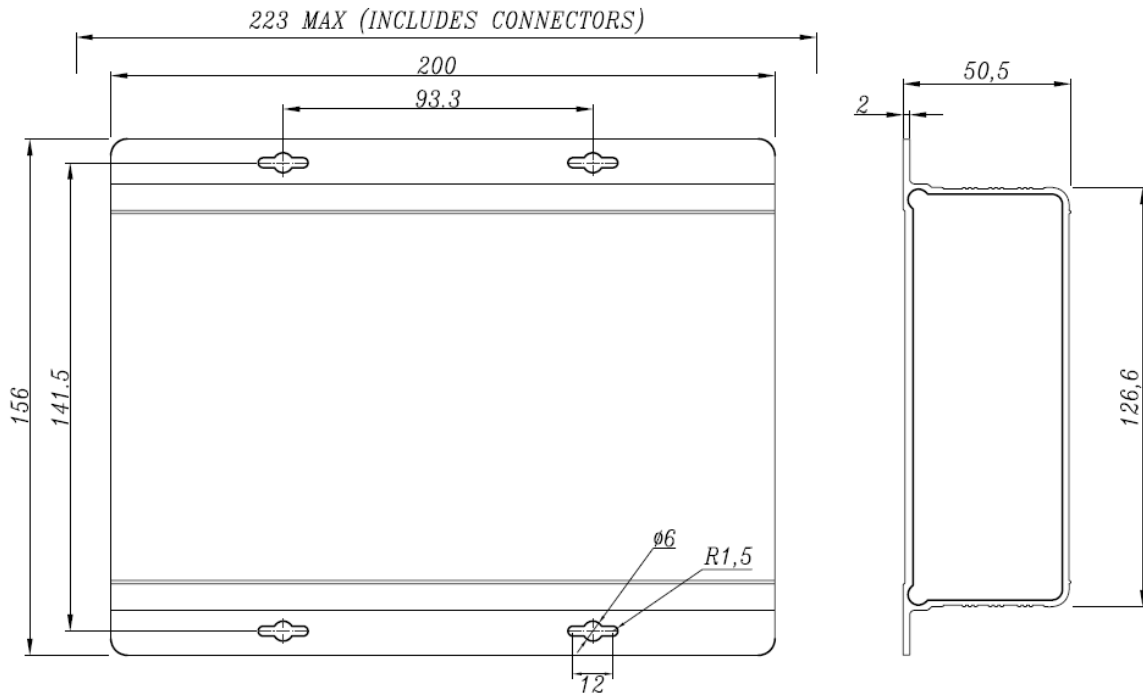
Dimensional drawings of Standalone unit (mm)
